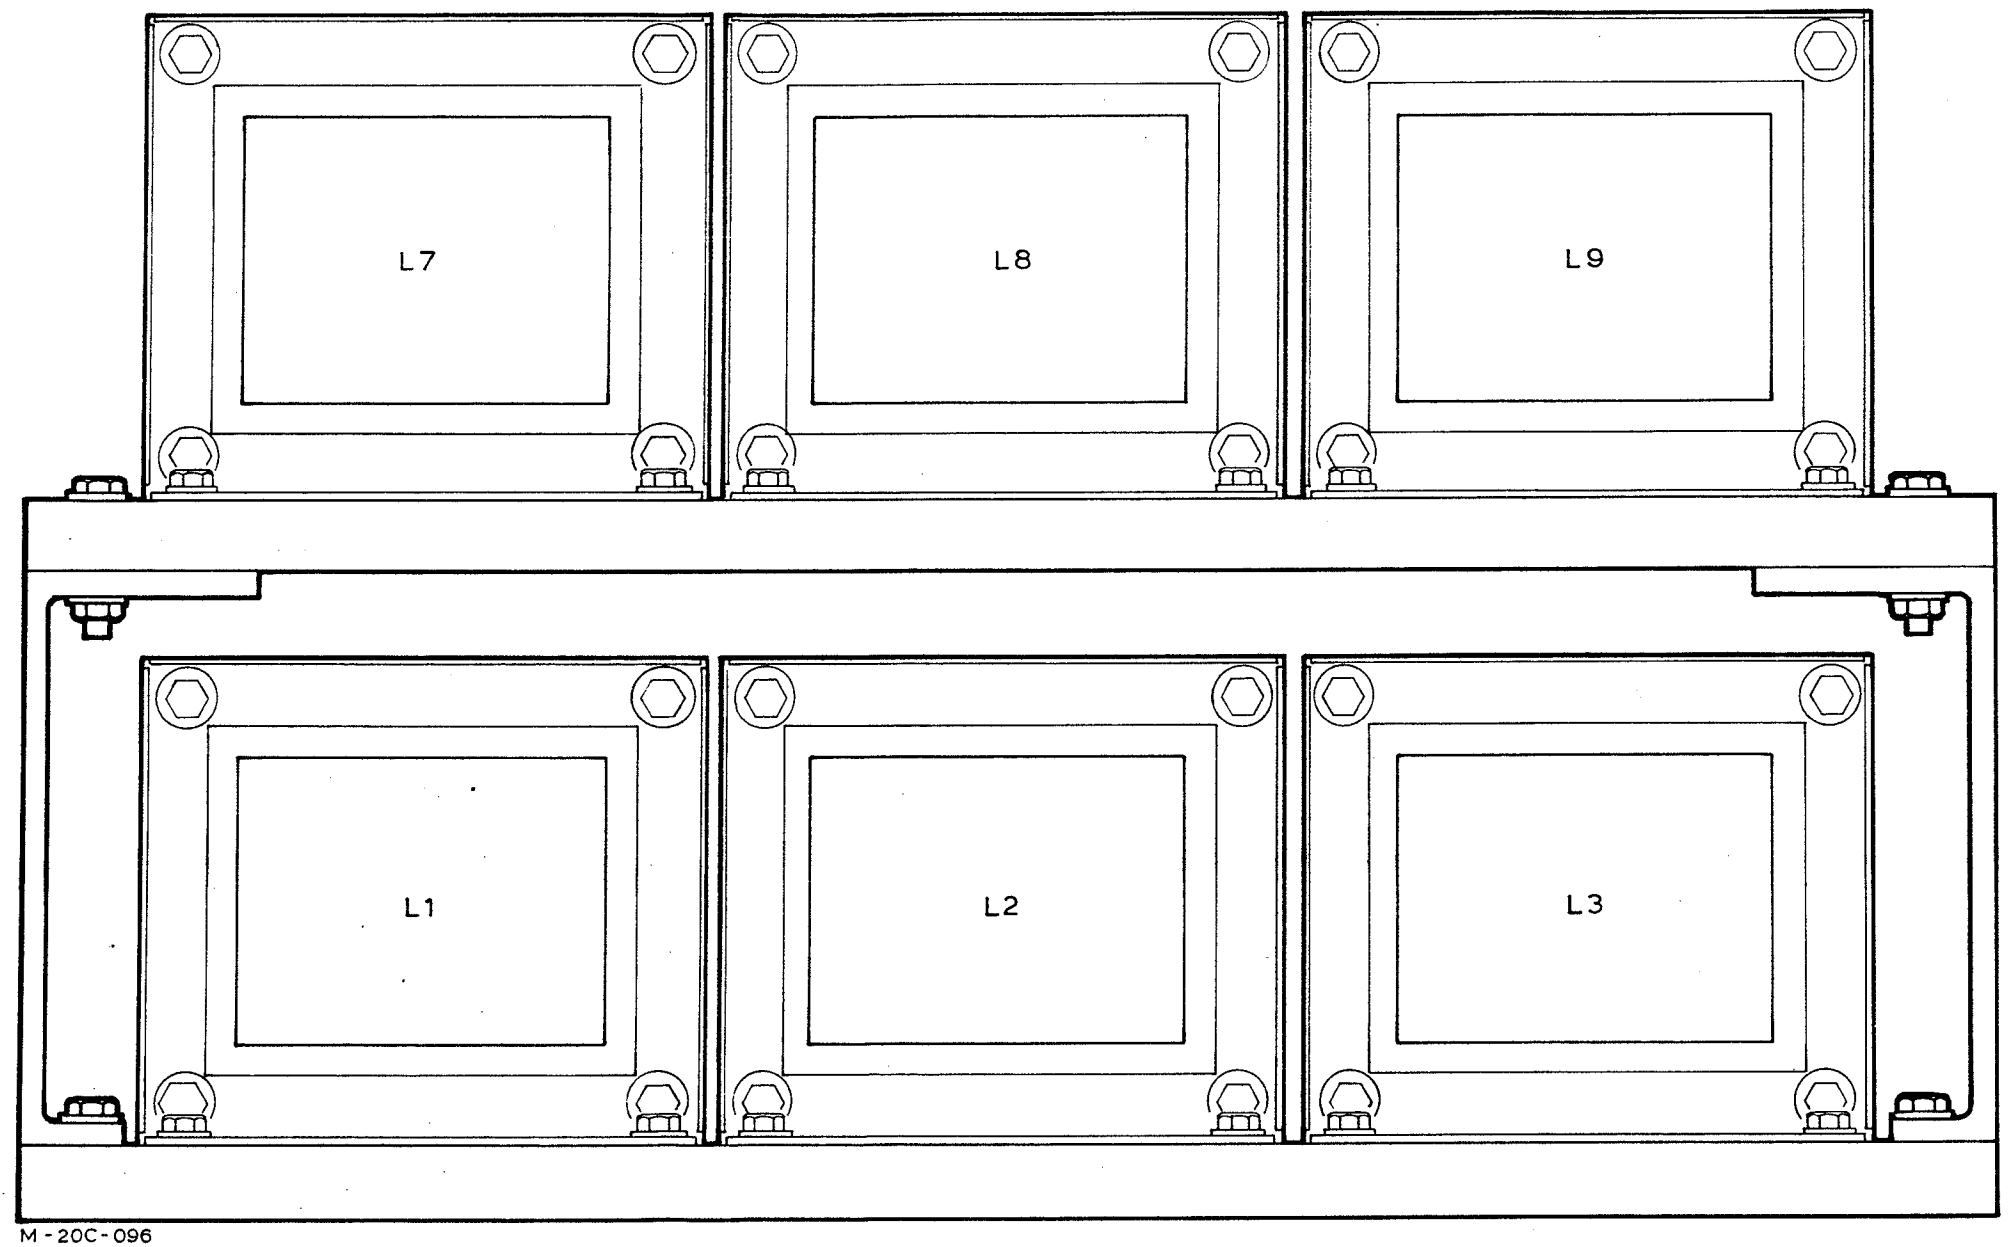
Assembly Detail - -72 Vdc Choke Tray (Front View)
